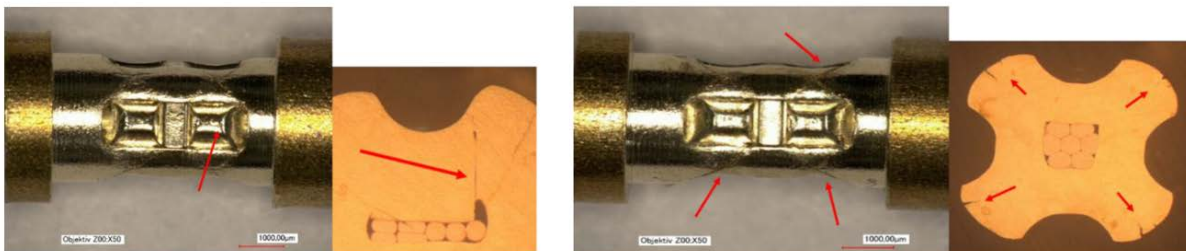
A crimp connection made of CuZn42 with cracks.
